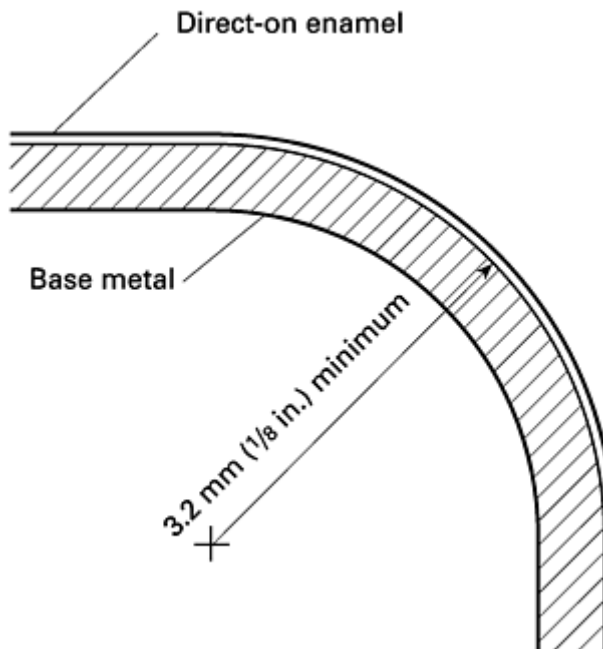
Radius of curvature, one-coat enameling process. A minimum radius of 3.2 mm ($\frac{1}{8}$ in.) must be maintained at flanges, corners, and embossments to minimize assembly and field damage to parts coated by the one-coat enameling process.
